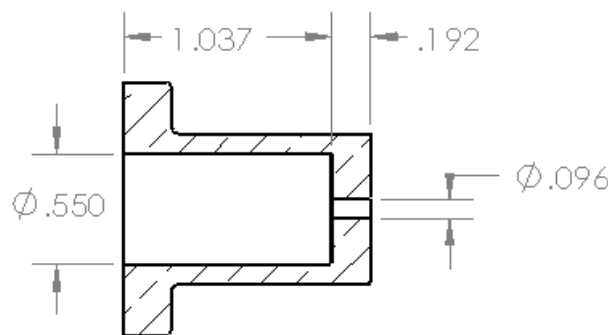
Drawing of the ‘2-2S’ nozzle (all dimensions are in inches)
